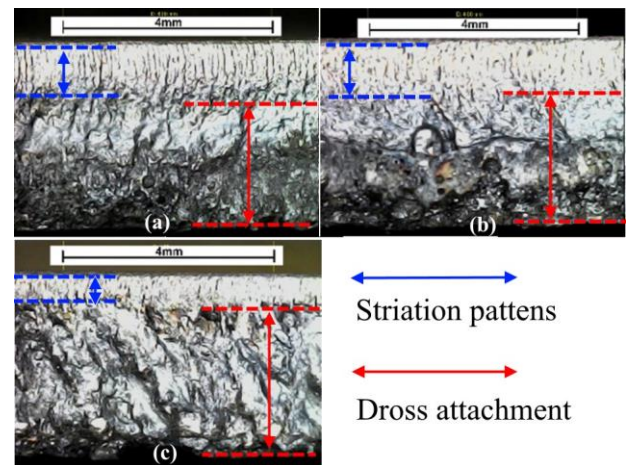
Morphology of the cut surface with a nozzle diameter of 1.5 mm and cutting speed: (a) $v = 2$ m/min; (b) $v = 3$ m/min; $v = 4$ m/min;
